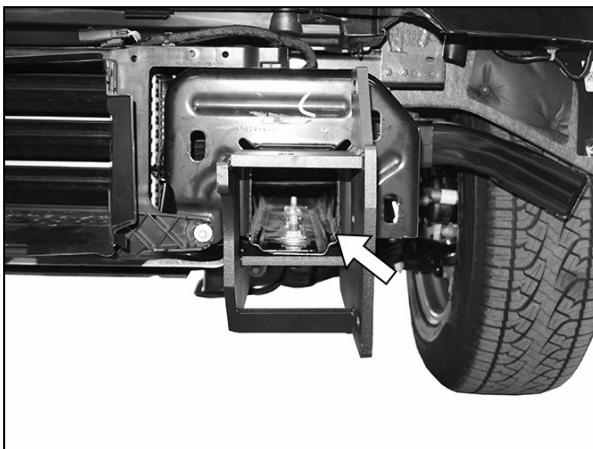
Remove bumper. Also remove the factory frame extension (arrow-
